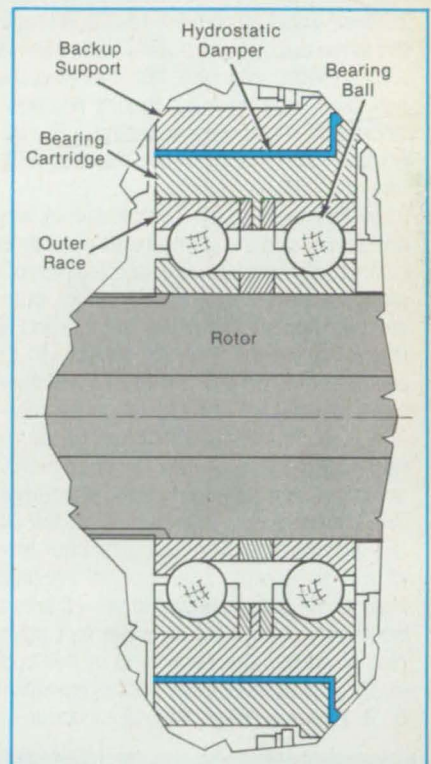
The Bearing Package, shown here in simplified form, supports the rotor shaft.
